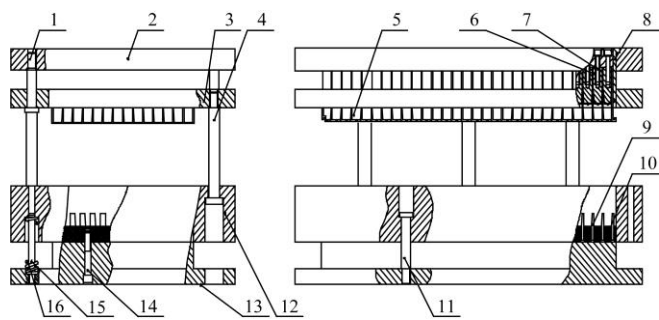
RY-1000 type forming machinery of SGBTMPS.
